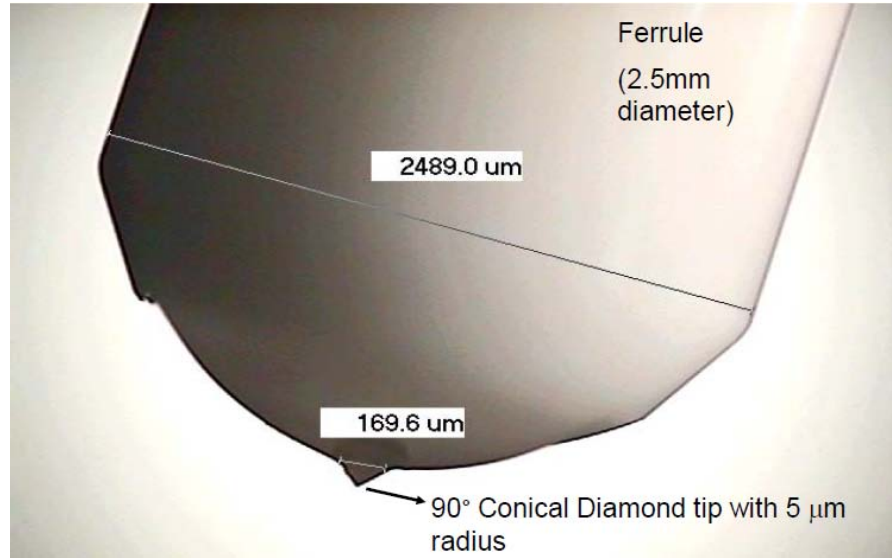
90°conical single crystal diamond tip with 5 μm radius spherical end attached on the end of the ferrule using epoxy.
